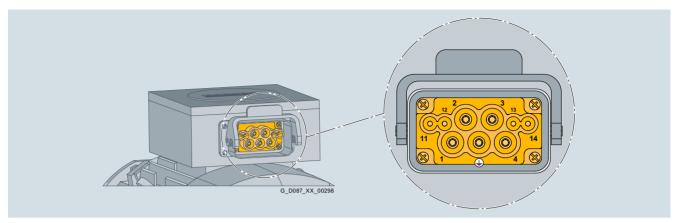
/20 HAN K4/4 motor plug with pin assignments
